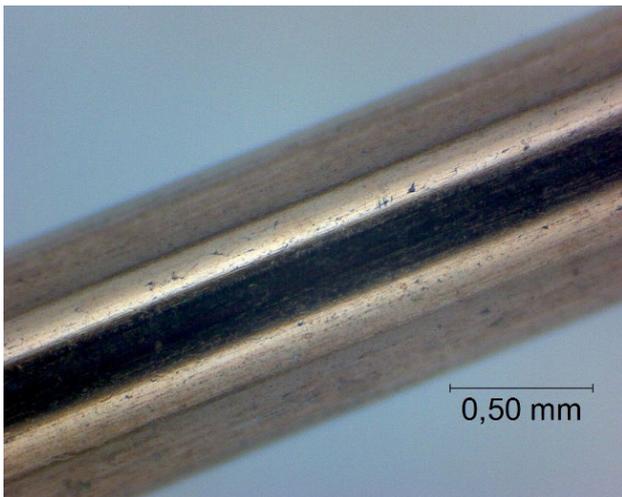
Copper-plated welding wire SG 2, delivery condition
